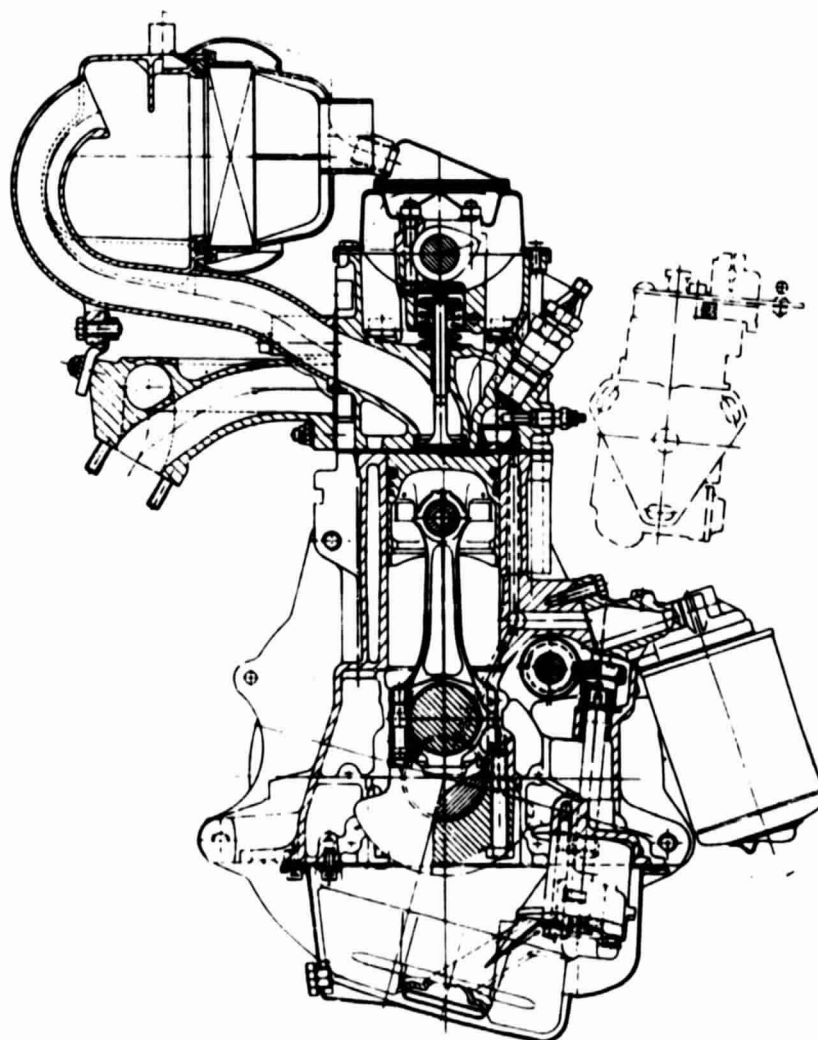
Cross-Sectional View of 1.5-*l*, 50-hp, VW Automotive Diesel (Ref. 25)
